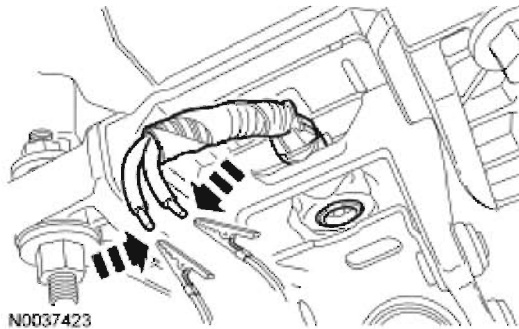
Attaching Each Wire Of Jumper Harness To Each Wire Of Deployable Steering Column
